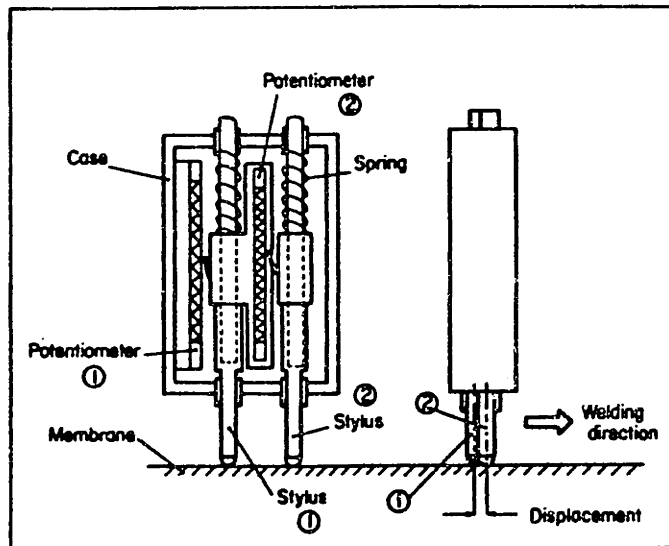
Tactile sensor on NKK welding machine. (54)
